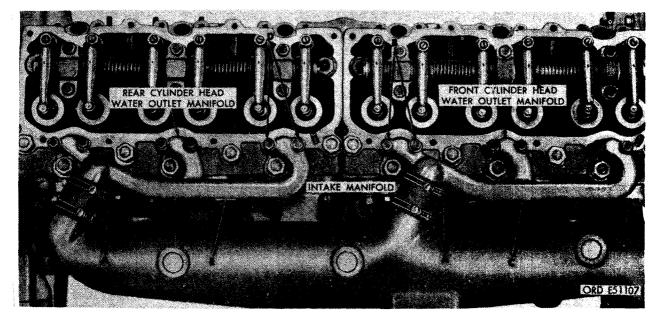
REMOVING OR INSTALLING FRONT AND REAR CYLINDER HEAD WATER OUTLET MANIFOLDS.
